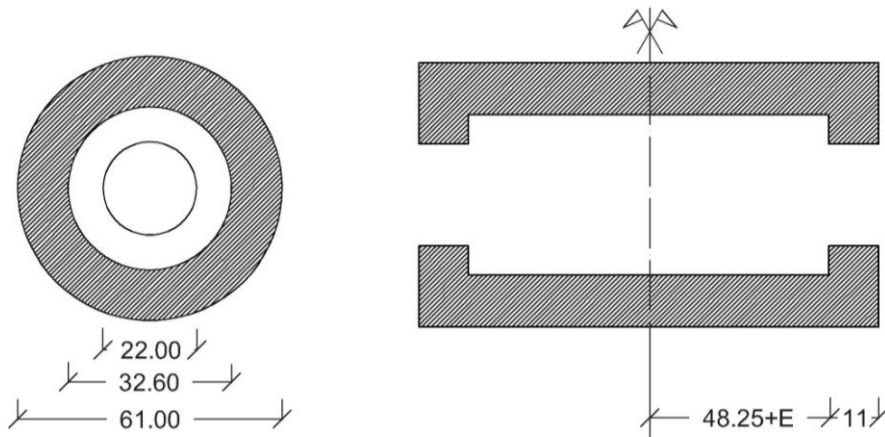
Front and side views of the interruption fixture used in the FE model (dimensions in mm).
